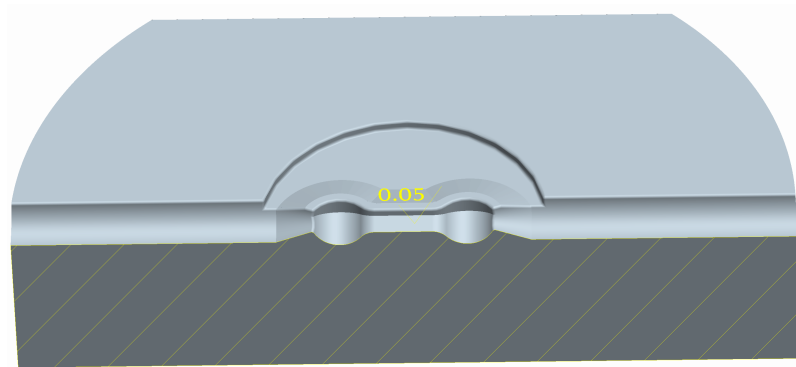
Suggested die geometry for the final forging step of the new three step forging procedure.
